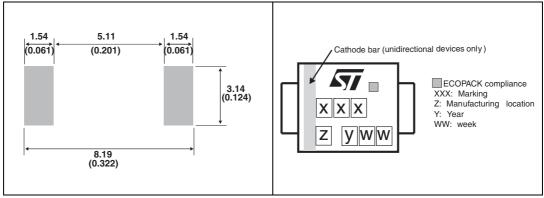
SMC footprint dimensions in Figure 18. Marking layout<sup>(1)</sup> mm (inches)
